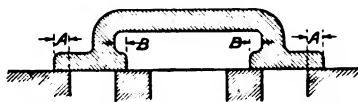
Section of Slide Valve, Showing Steam and Exhaust Laps
